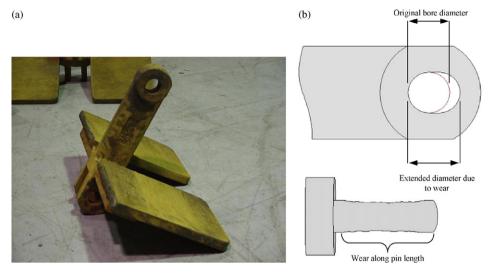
(a) Single link/paddles assembly from a drag chain conveyor, (b) schematic showing location of wear for link bore and pin.
